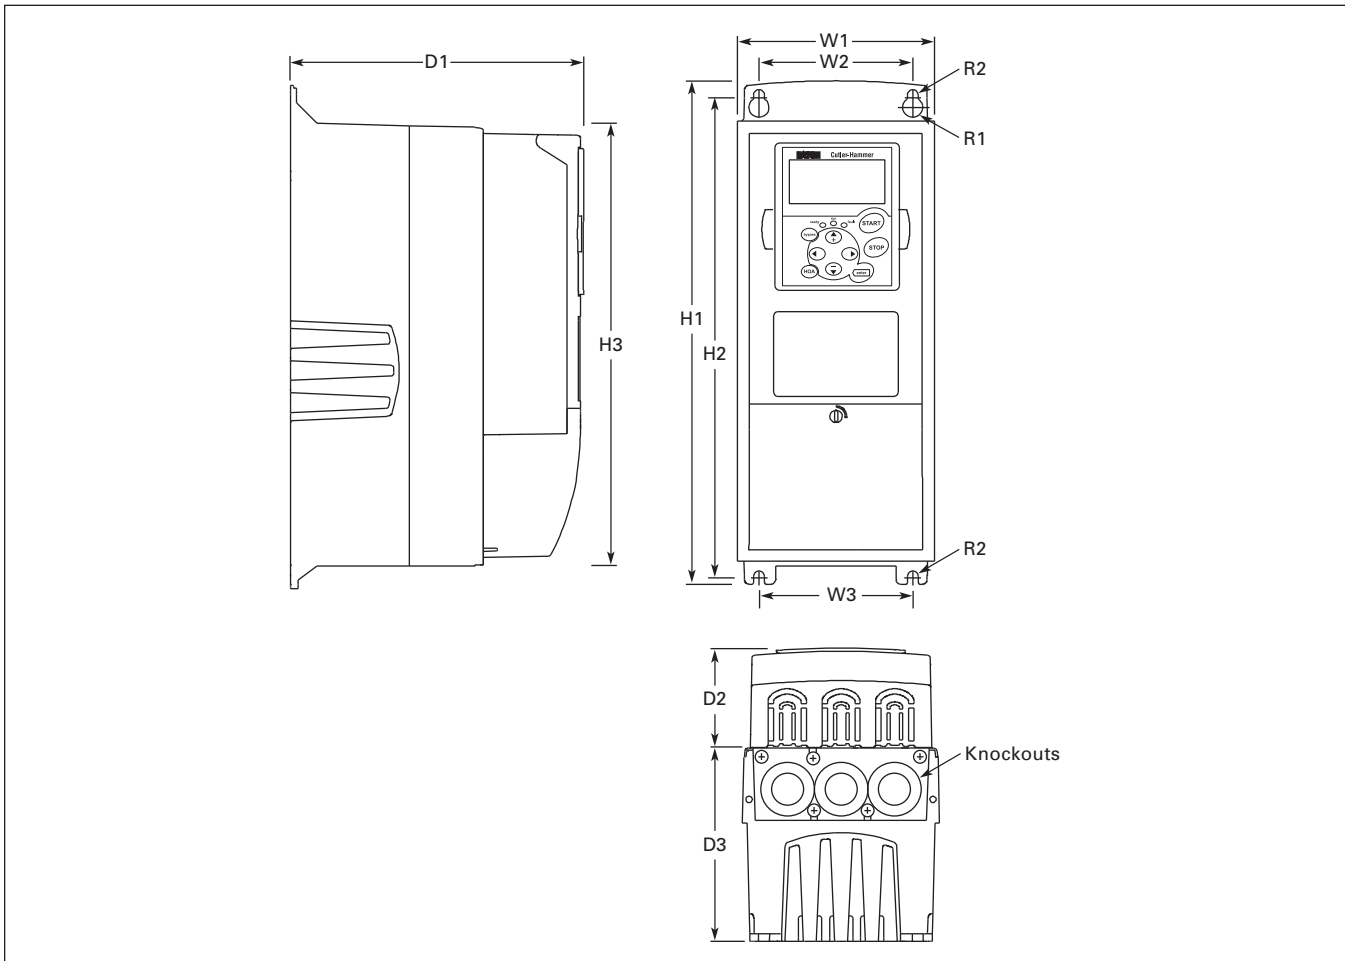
TYPE 1 and TYPE 12 VSD Series Open Drive Dimensions, FR4, FR5 and FR6
